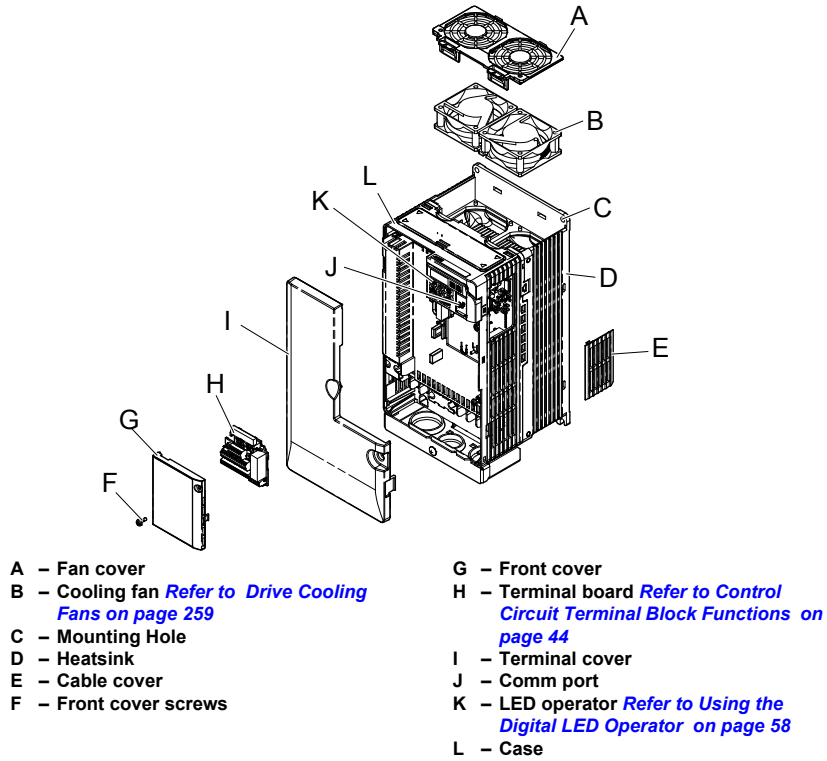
Exploded view of IP20/NEMA Type 1 Components
